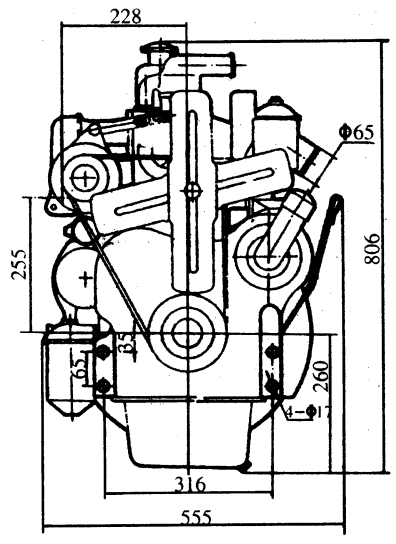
Outline drawing for 495Q1, 495Y1 - 1, 495G6 diesel engine
